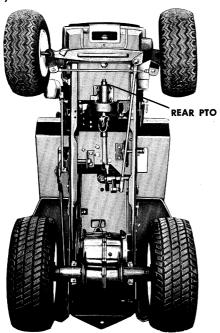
REAR PTO SHOWN WITH DRIVE SHAFT ATTACHED
